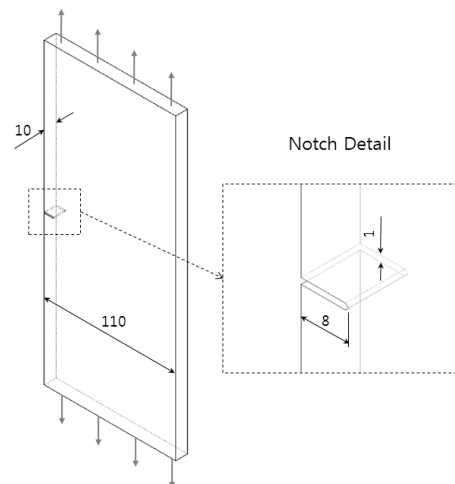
Single Edge Cracked Plate Tension Specimen(SECT)
